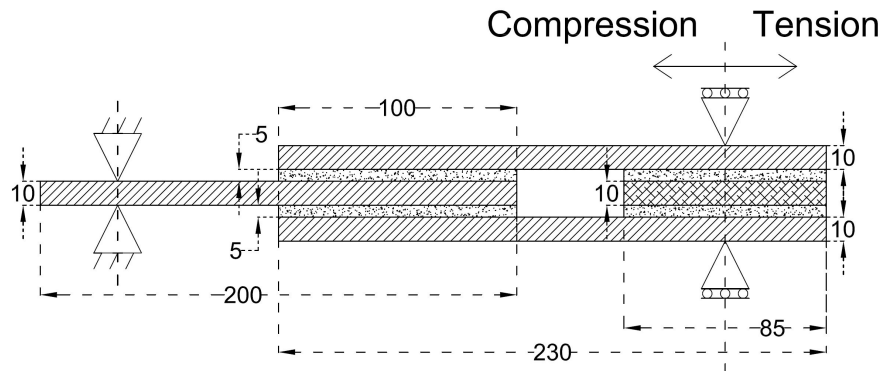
Longitudinal section of joint specimen, dimensions in (mm) [29].
